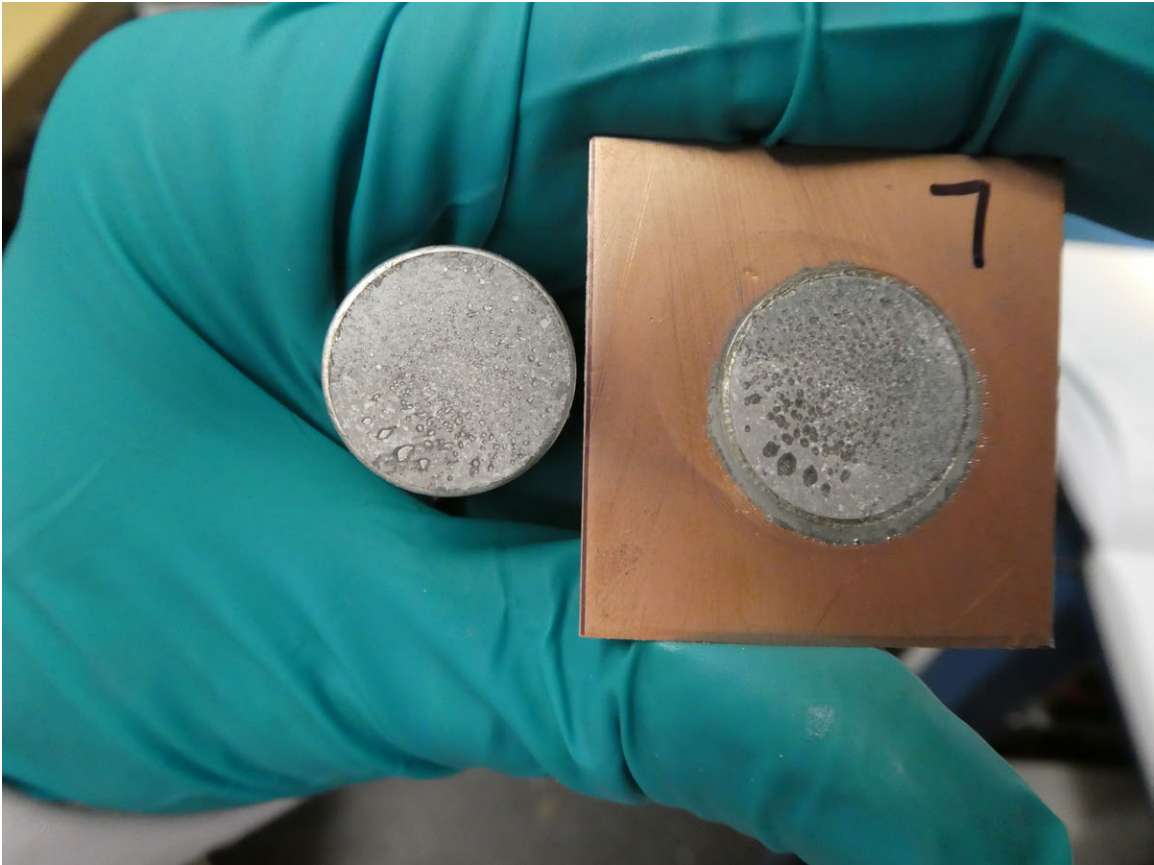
A soldered cell sample torn from the MCPCB to inspect the solder joint. There is visible porosity despite the moderately strong bond.
